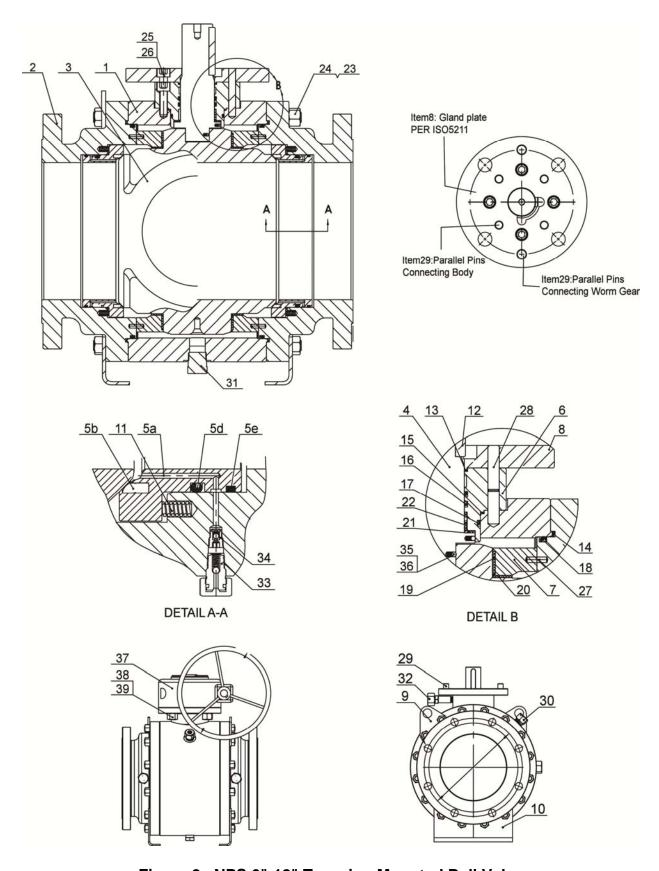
NPS 6"-12" Trunnion Mounted Ball Valve
